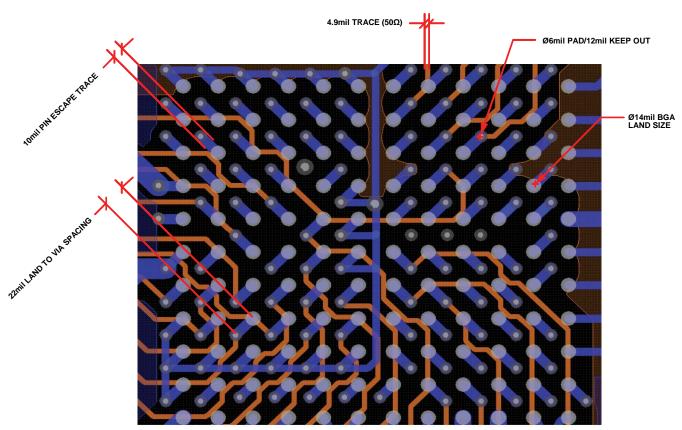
0.8 mm Pitch BGA Via Fan-Out
